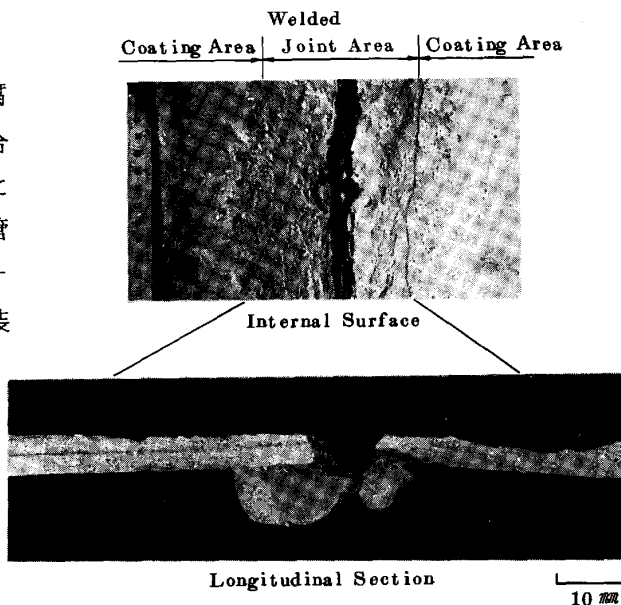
Selective corrosion of welded joint area of tarepoxy coating pipe used during 12 years in Sea water.
